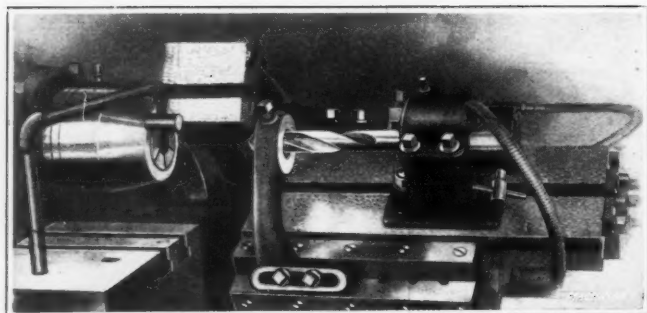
Standard Type of Drill-holder and Drill-support in Operation
